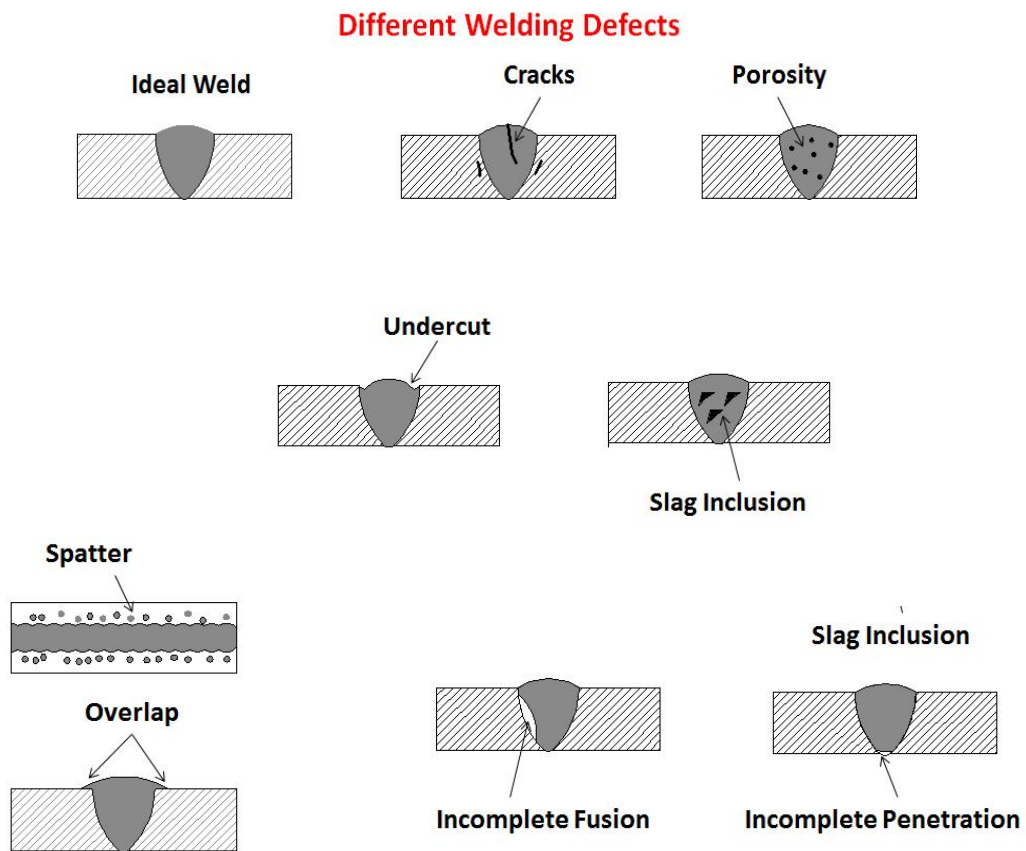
Welding defects can be classified into two types as external and internal defects
